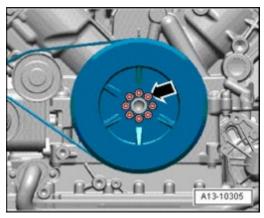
Loosening Mounting Bolts On Vibration Damper Courtesy of VOLKSWAGEN UNITED STATES, INC.
